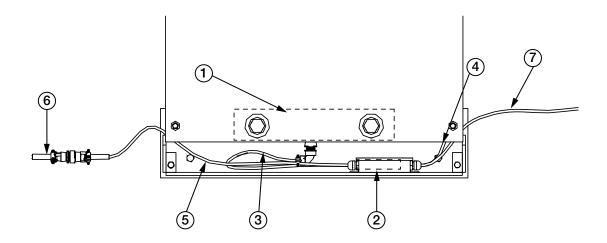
Replacement Parts Drawing (Weigh Pad 2 Shown)
